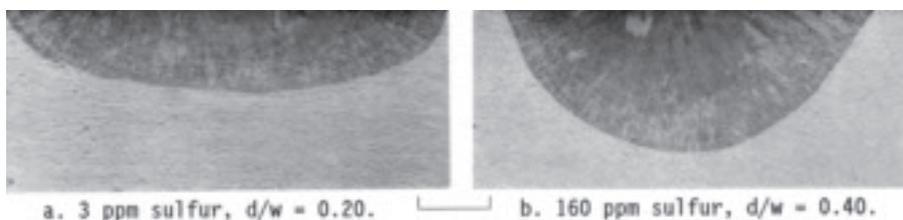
Weld cross sections in 304 made with same GTA welding parameters.
